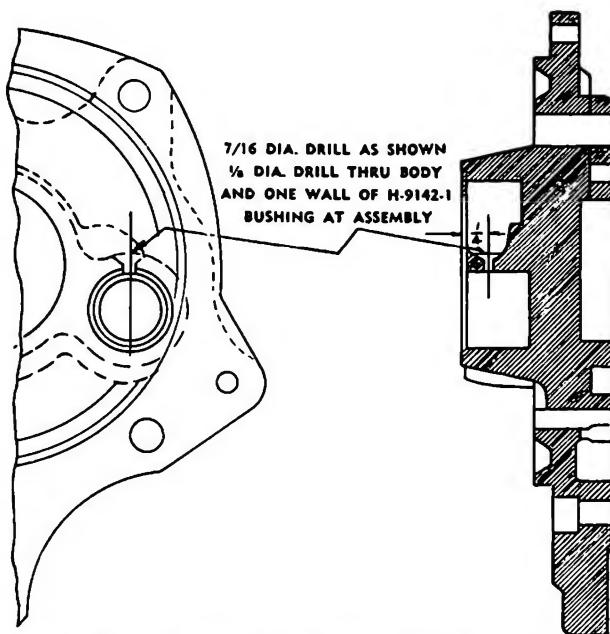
Drilling to provide cam rocker lever lubrication
